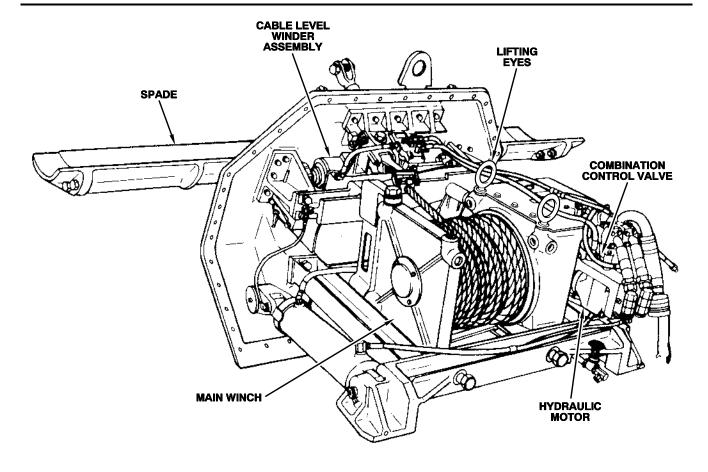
Main Winch and Spade Assembly—Left-Rear View.
